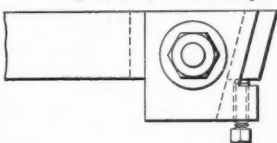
Threading Tool-holder with Adjusting Screw for Cutter.
